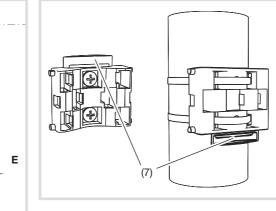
Wall fixing (left) or mast fixing (right) crescent-shaped ba
